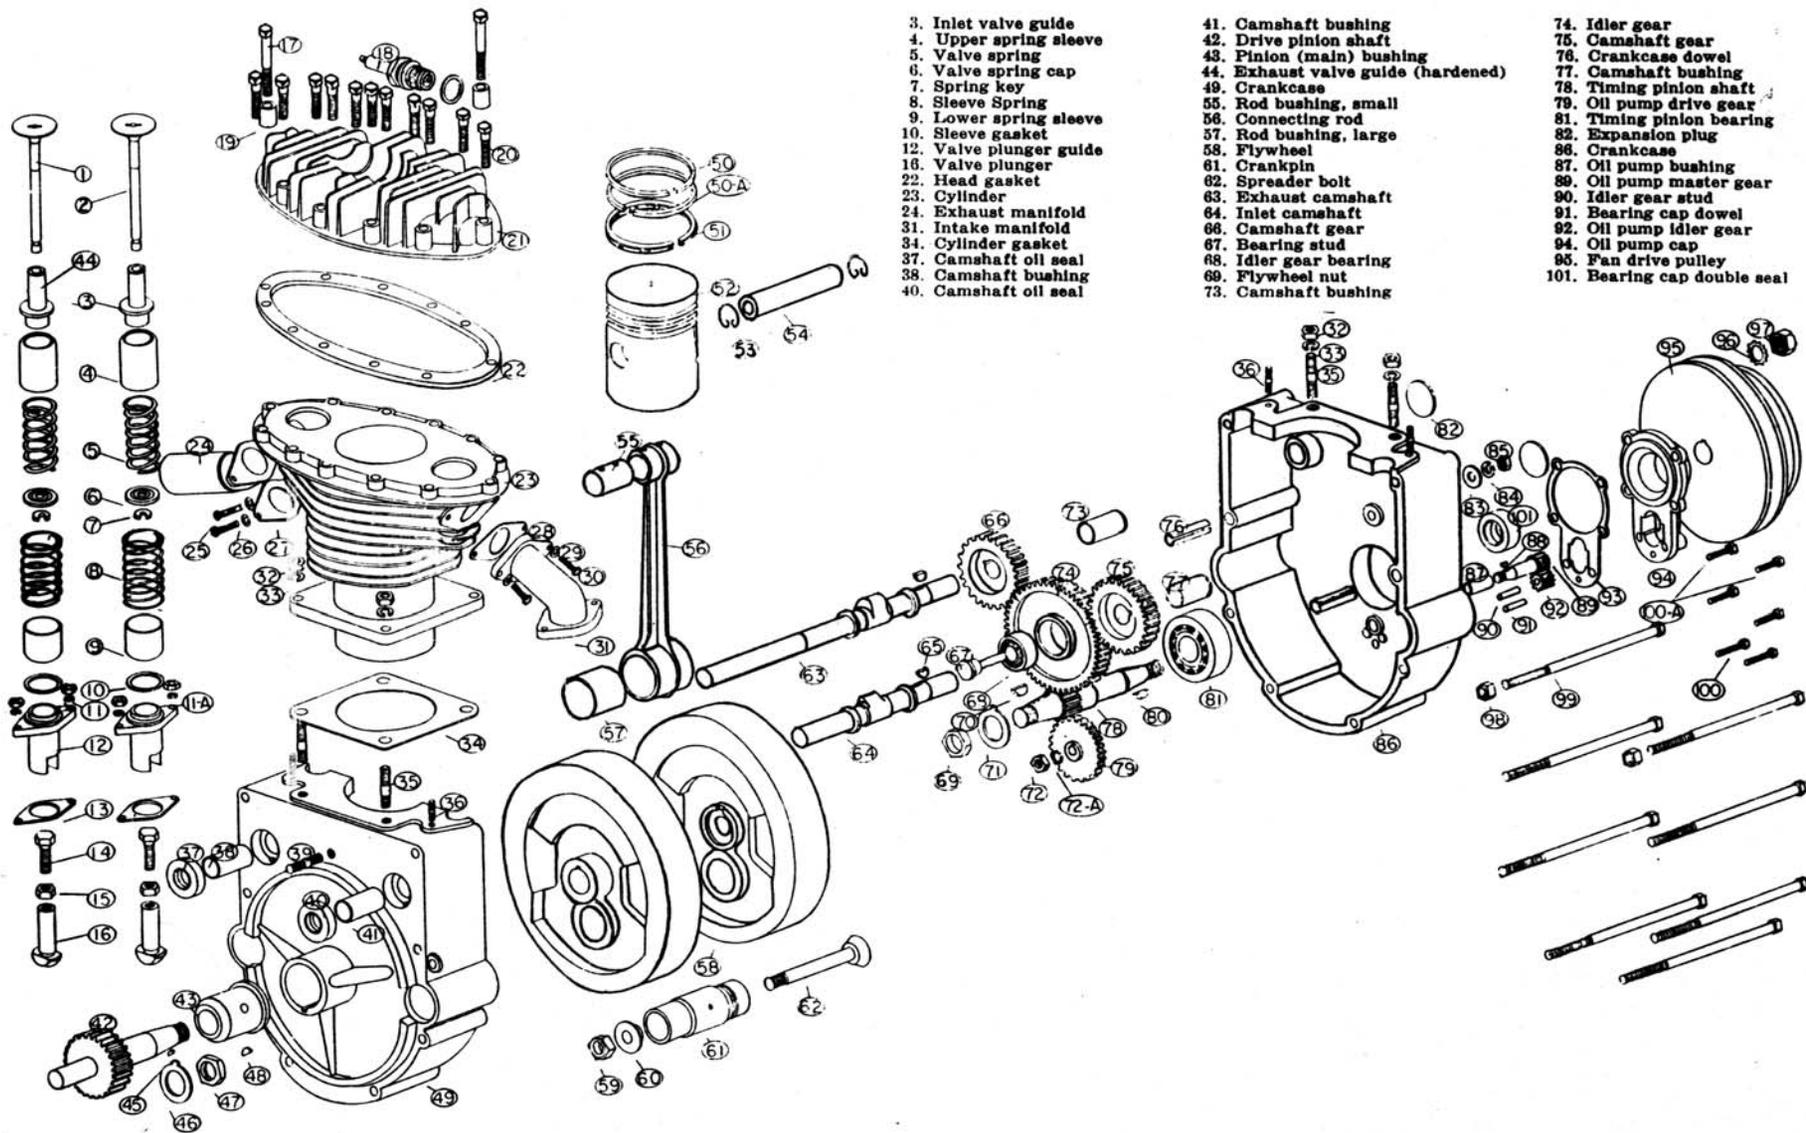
Exploded view of T head type engine used in Gravelly model L tractor. Note flywheels (58), pin (61), rod (56) and shafts (42) and (78) are actually components of a built-up type crankshaft assembly.
